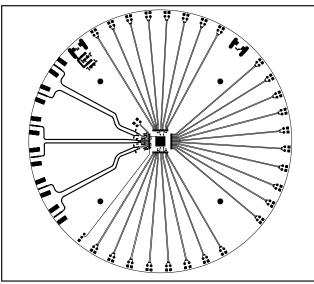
MAX105 EV Kit PC Board Layout—Component Side
